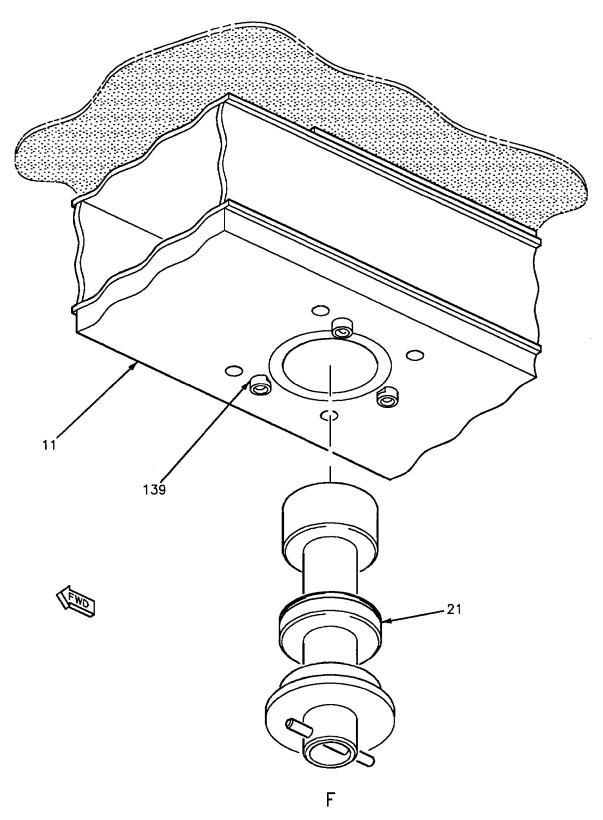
Drilling Holes at Inboard and Outboard Pylon Positions (Sheet 6)
